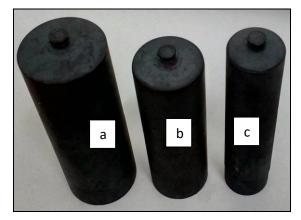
Fabricated tools after heat treatment. Diameter (a) 24mm, (b) 20mm, (c) 16mm
